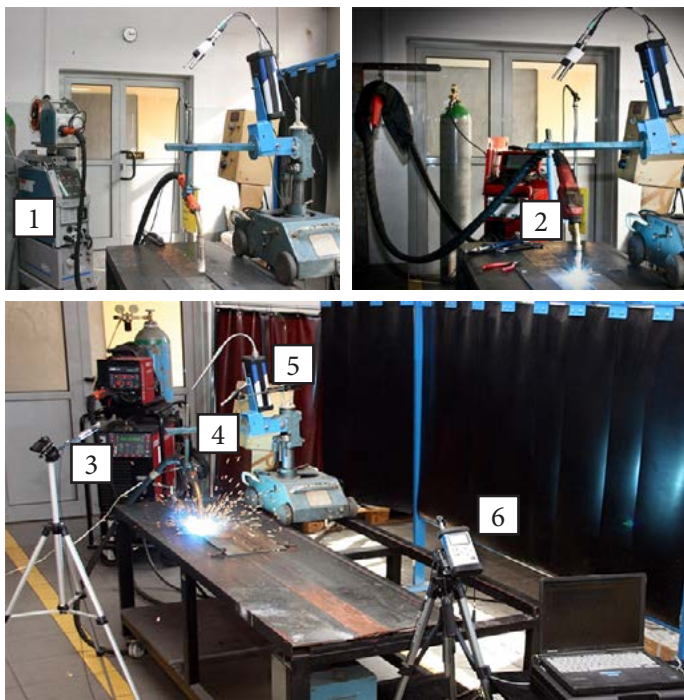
Experimental stand for testing acoustic pressure levels during gas-shielded arc welding [6]
